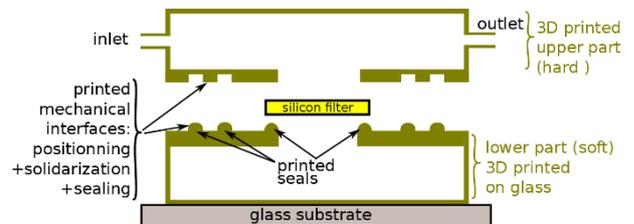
Precisely 3D printed parts comprising mechanical, fluidic and sealing functions, combined with a high-precision silicon filter.
